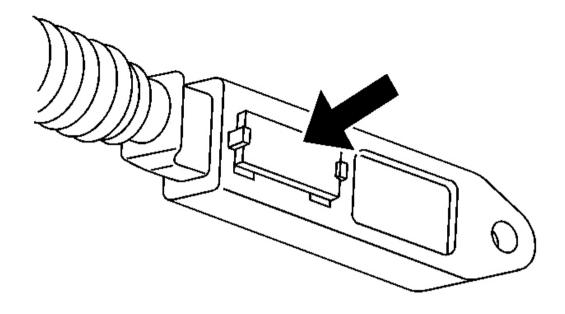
Depressing The Shift Control Cable Adjuster Lock Courtesy of GENERAL MOTORS CORP.
